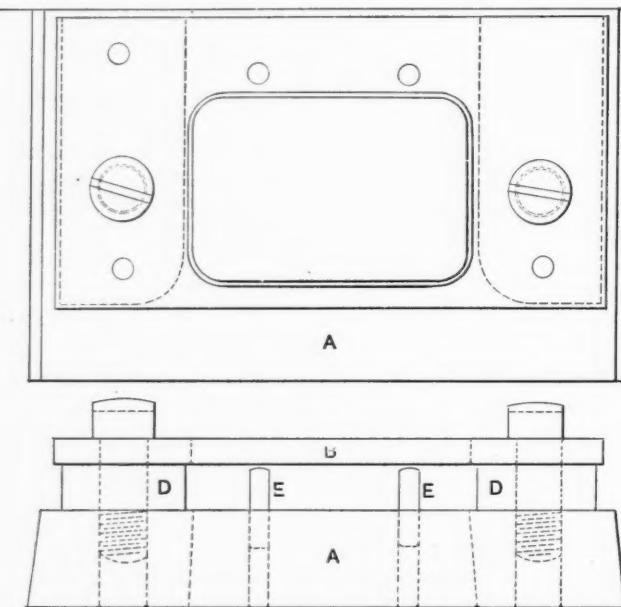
Plan and Side of Die used for Cutting out Bottom.
